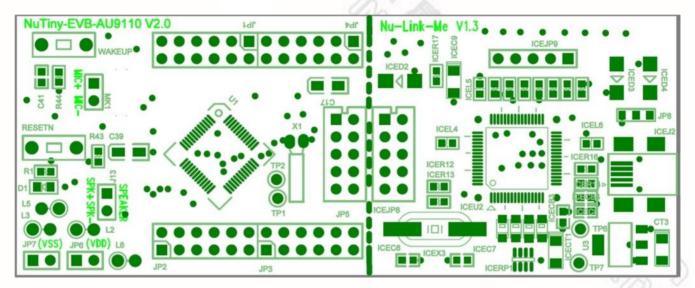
The top placement of Nutiny-SDK-AU9110 PCB.
